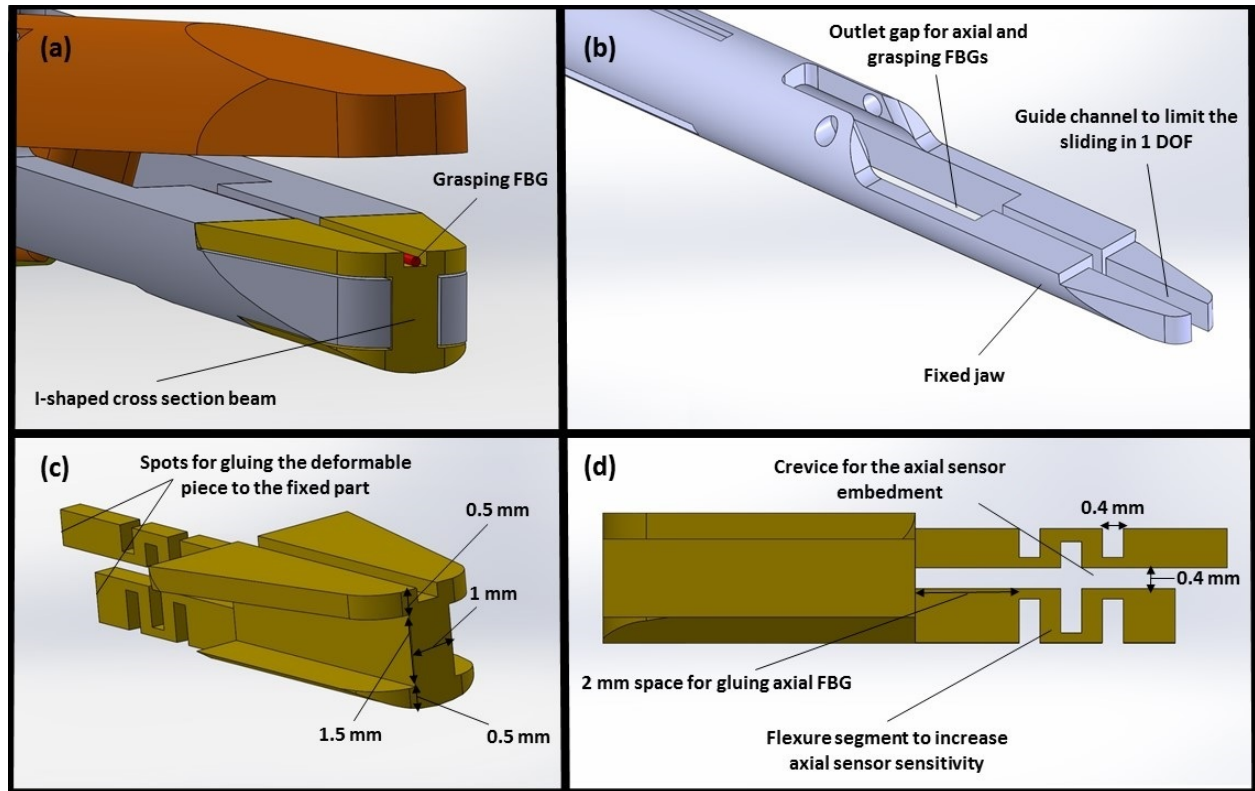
a) Sensorized needle-driver with an I-shaped grasper; b) Fixed part of the needle-driver lower jaw; c) Moving part of the needle-driver lower jaw; d) Accordion shaped deformable structure.
